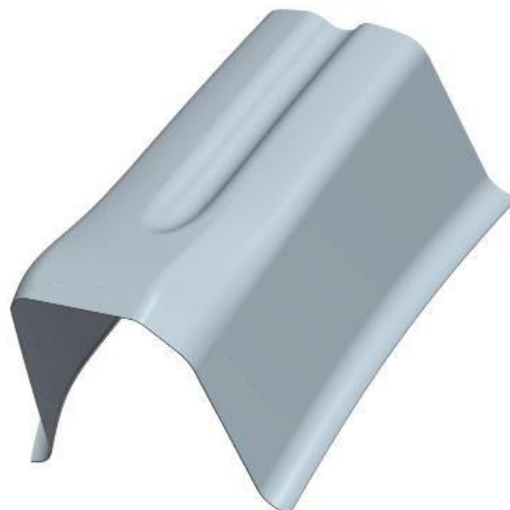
Punch of Press Hardening Tool - Demonstrator [18]
